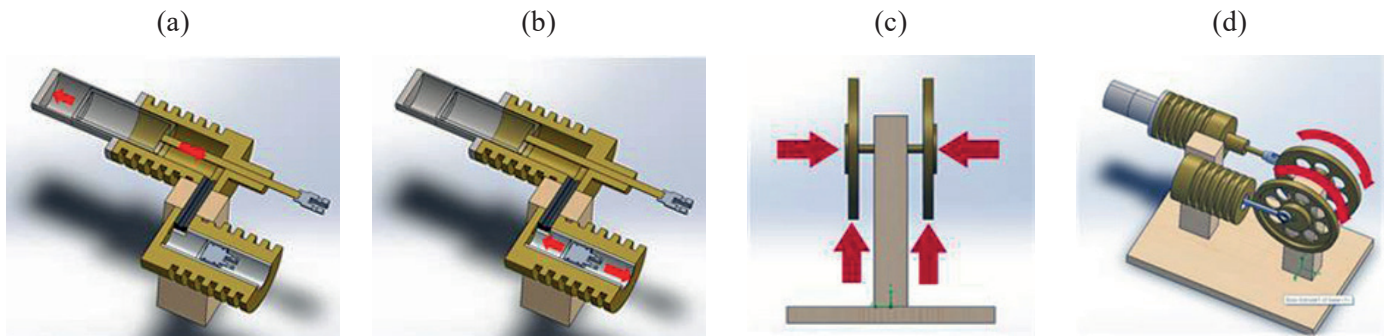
Pretest model of the engine; leakage test (a), friction test (b), mass balance test (c) and assembly test (d)
